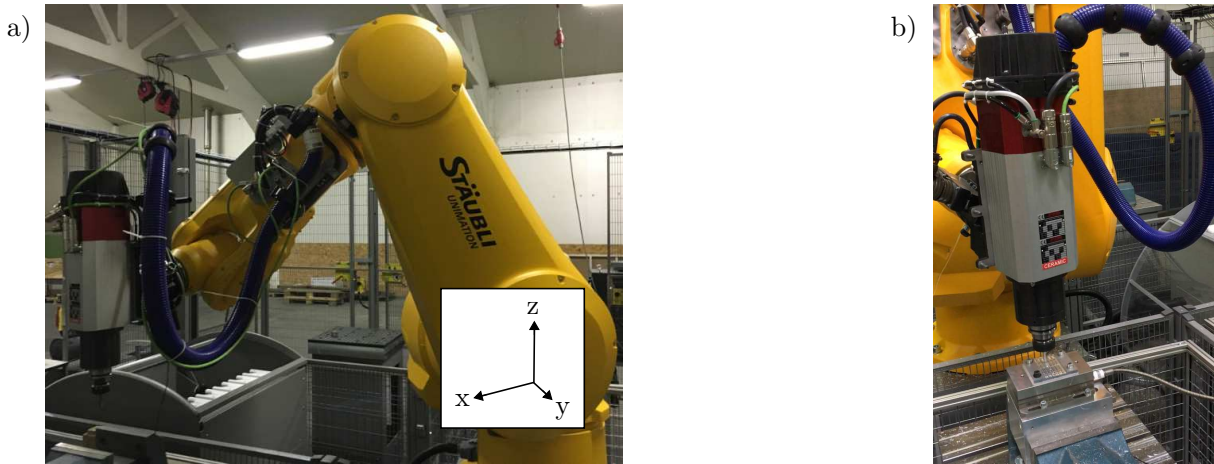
a) Robot initial configuration before milling - b) Milling of an aluminium plate
